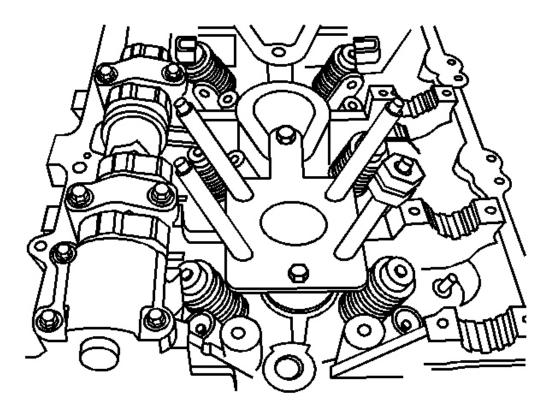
View Of J 44228 Base Plate Courtesy of GENERAL MOTORS CORP.
